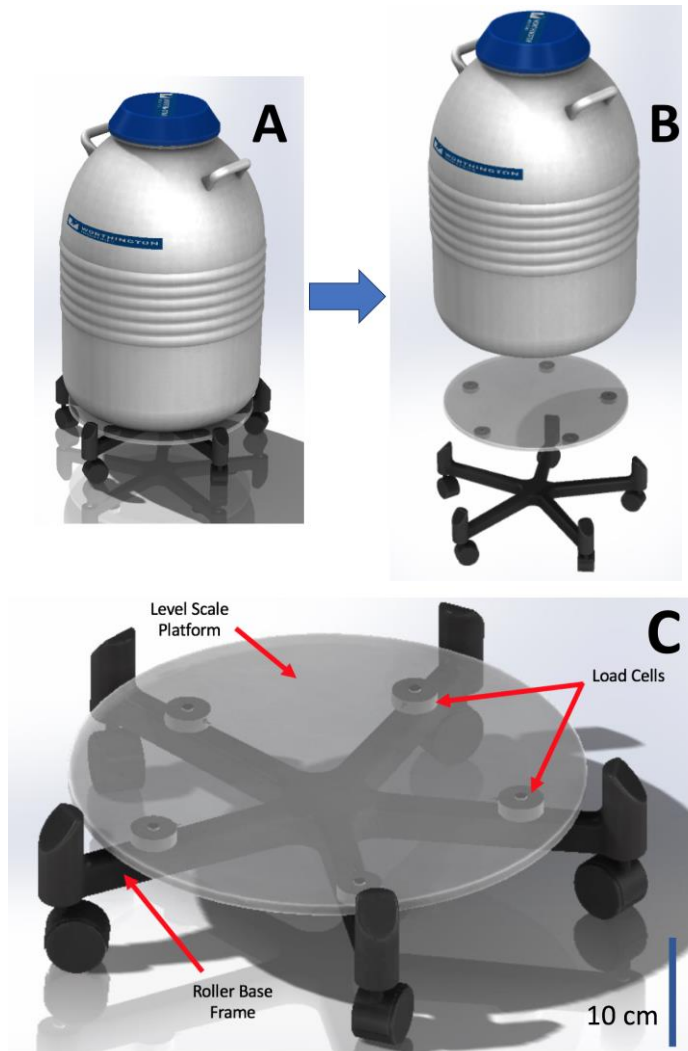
(A) Fully assembled roller base/weight sensor with the tank placed directly on the assembly. (B) An exploded view of Figure A, showing the individual components: roller base, weight sensor, and LN2 tank. (C) Annotations of the weight sensor integrated with the roller base.
